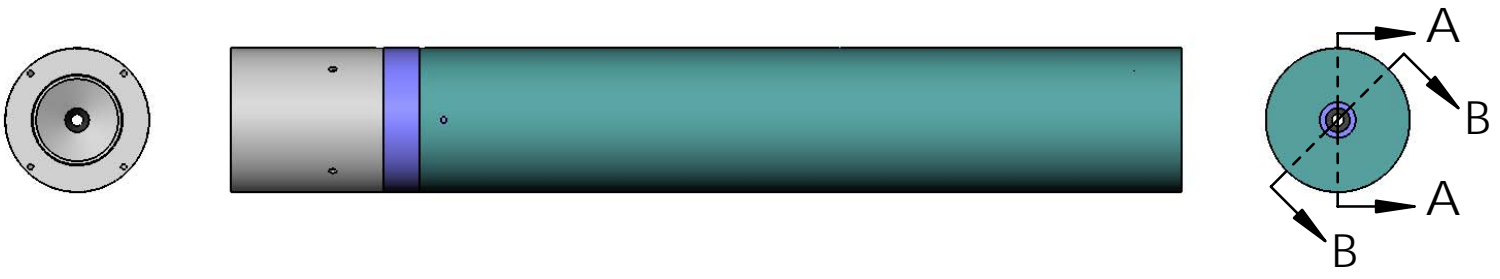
cm/ 2.72 inch Radial Inverted Motor
